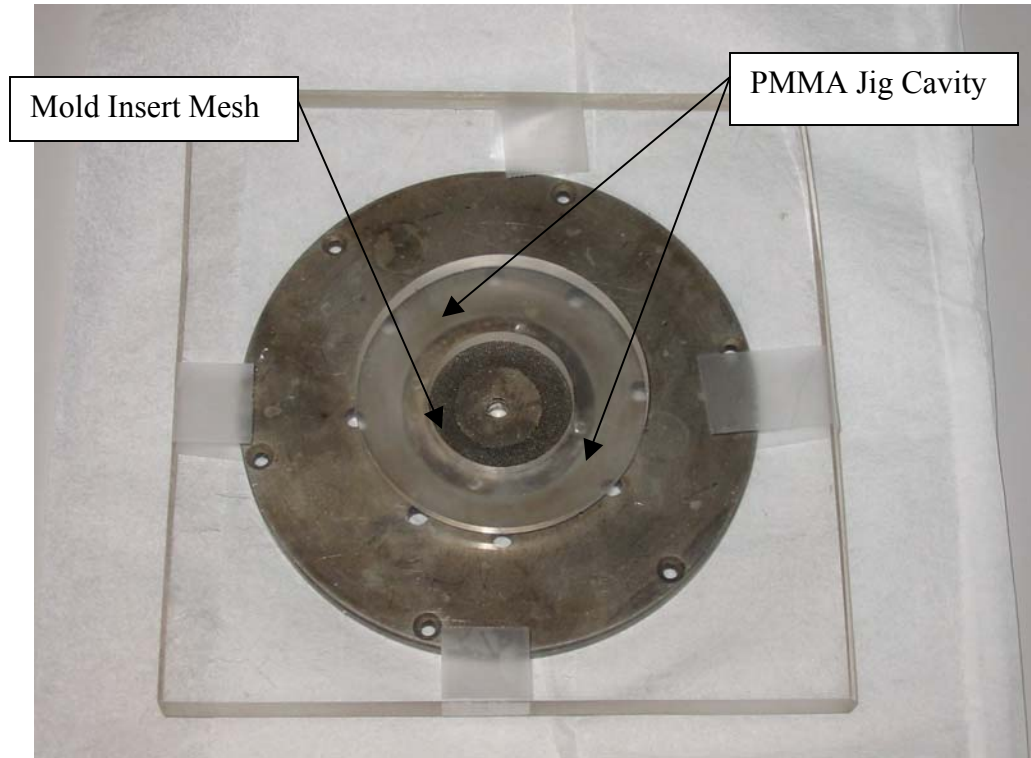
Mold Insert Clamped to PMMA Jig for Silicone Mold Production
